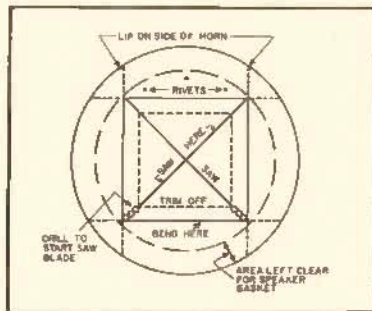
Detail of the speaker mounting ring to be attached to the horn of Fig. 3.
